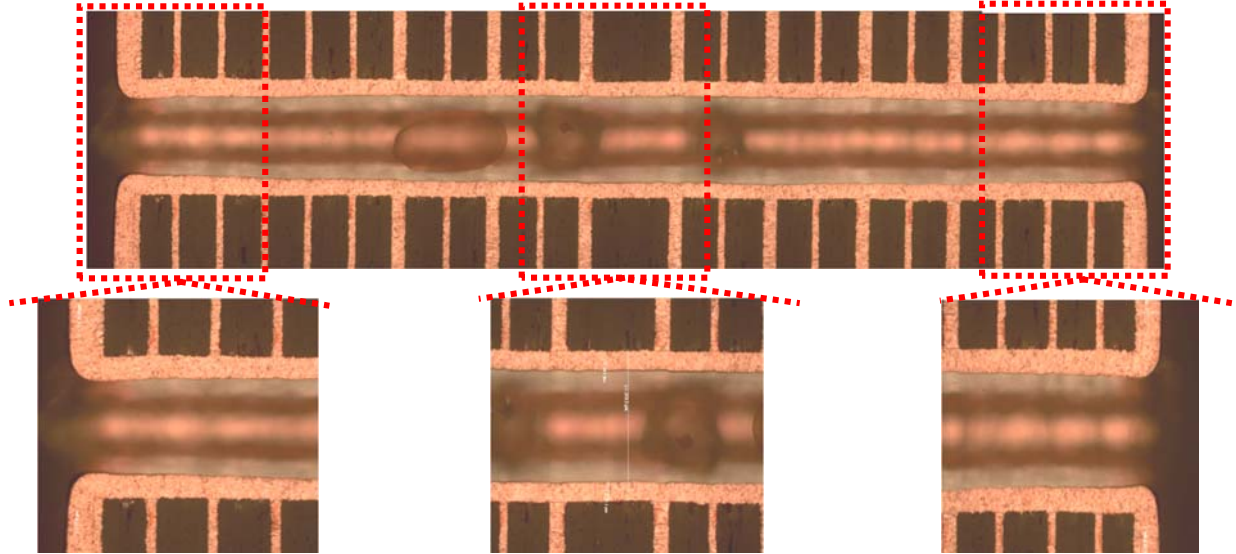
Cross Sections of IST 22 Layer Through Holes plated at 10 ASF with 2.4 mm Test Panel
